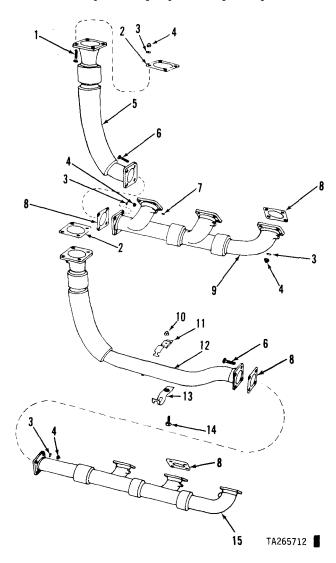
Exhaust manifold associated parts (right bank) - exploded view.
